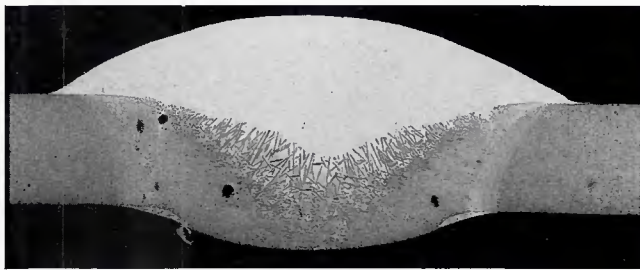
Weld made with preweld heat treatment at 750°F for 100 h in vacuum, AC, ER5356 (no etchant, 11X).
